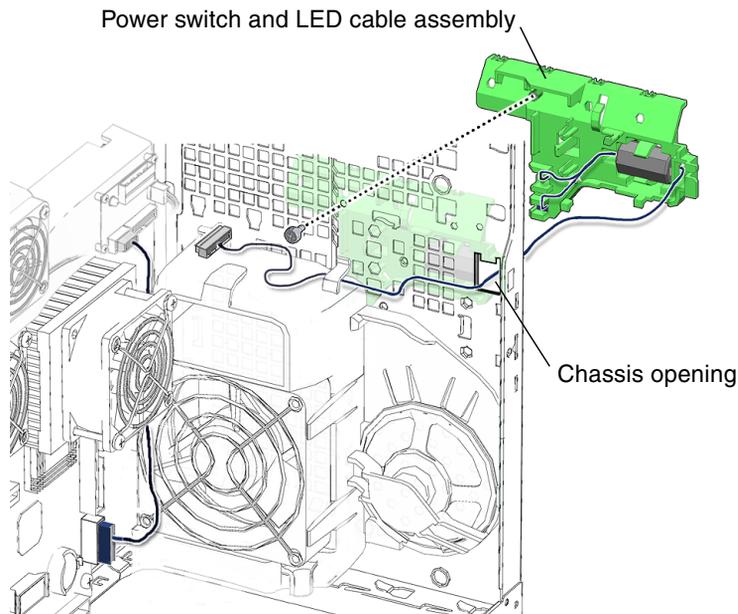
Routing the Power Switch and LED Cable Through the Front of the Chassis
